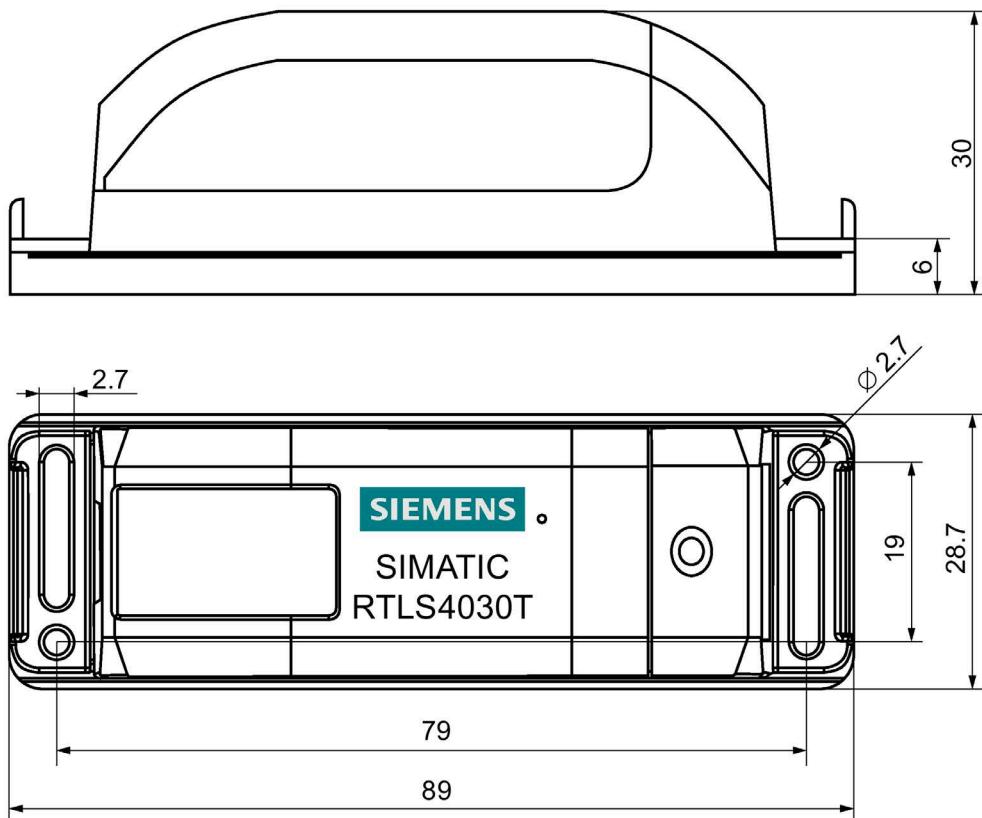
Dimension drawing SIMATIC RTLS4030T - All dimensions specified in millimeters
